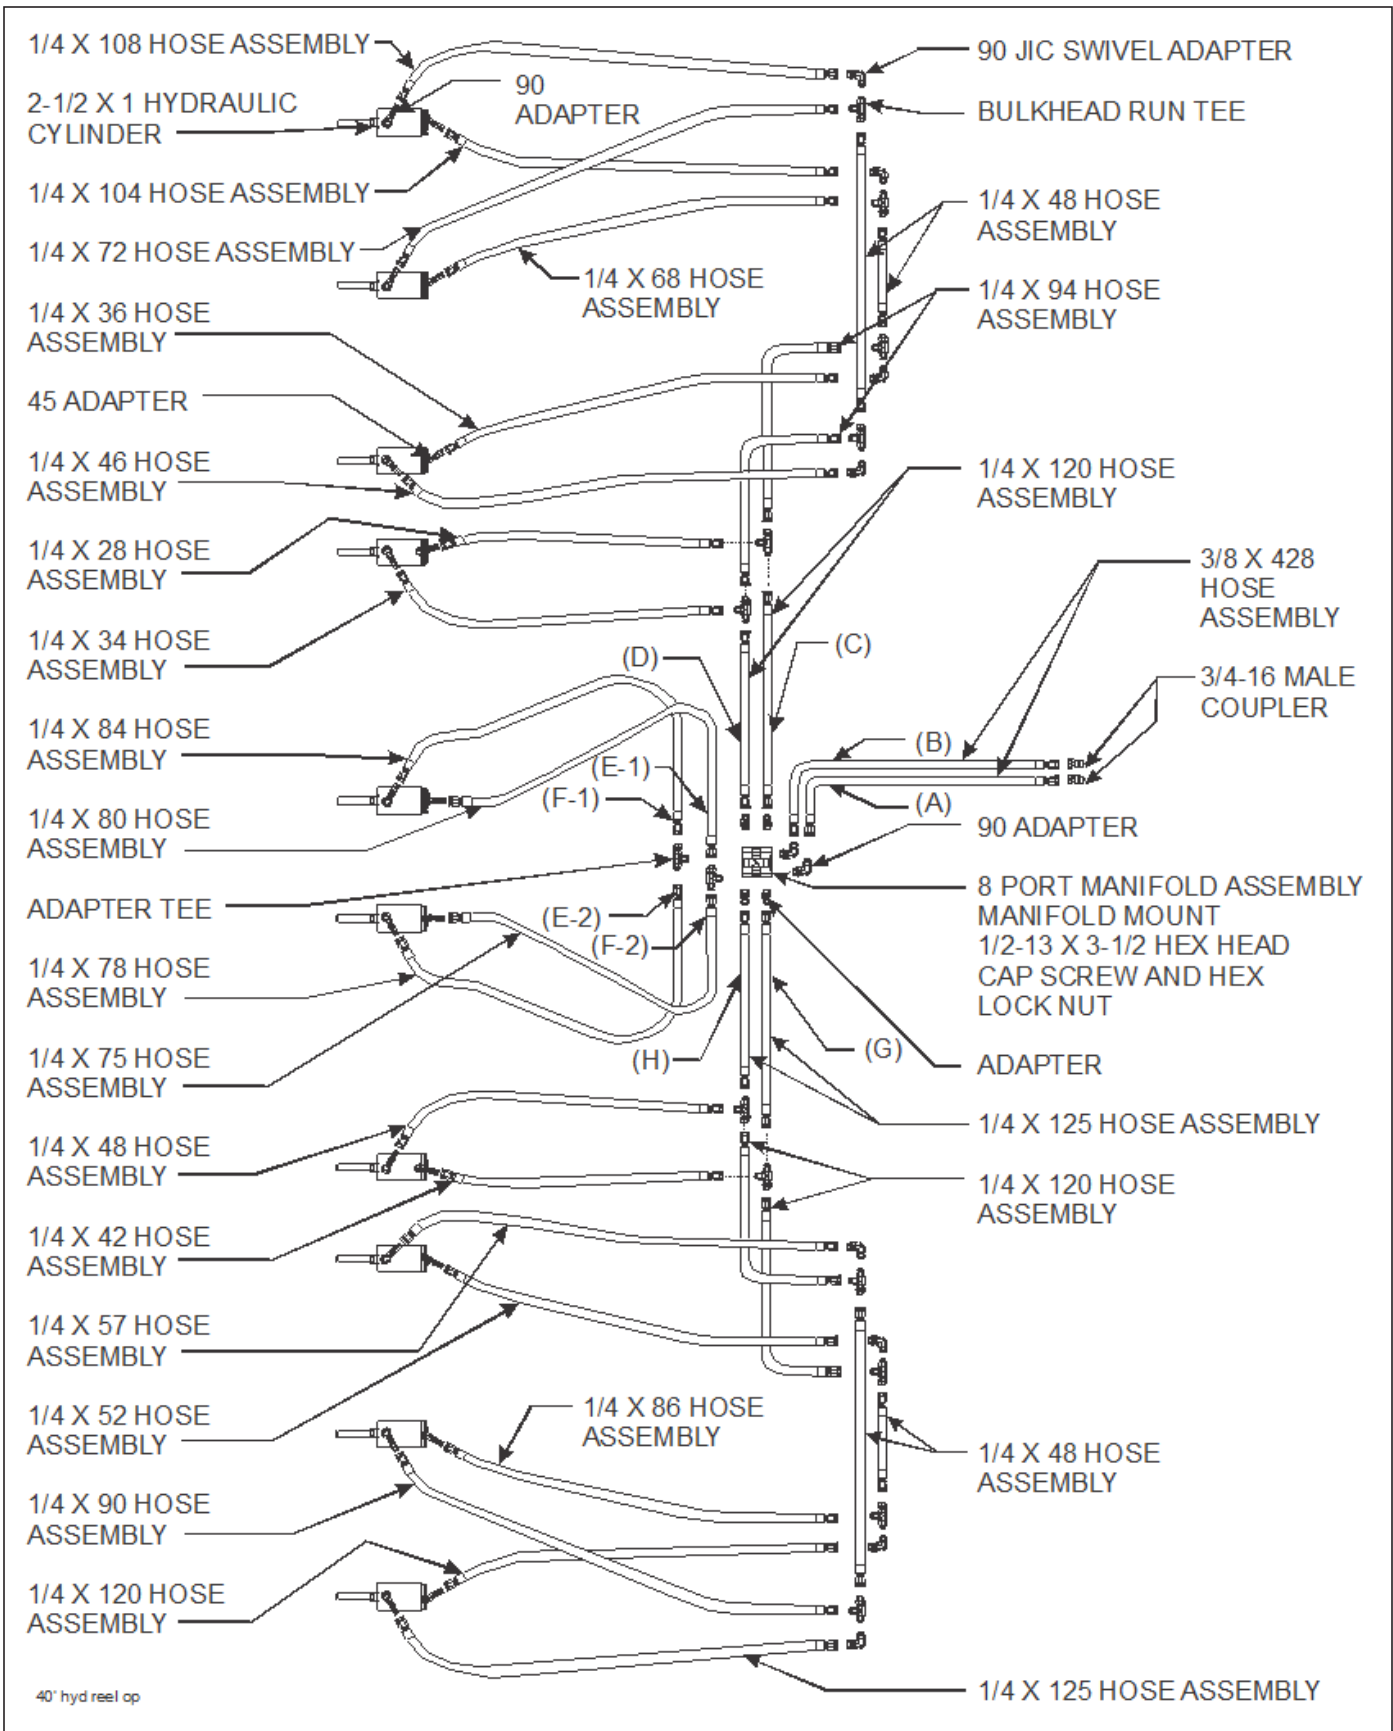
Finishing Reel Hydraulic Installation (40' Model)
